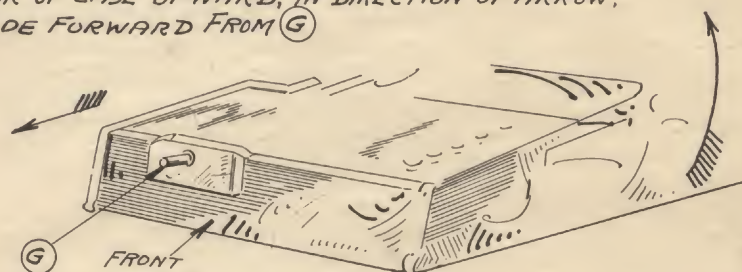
NOTES ON DISMANTLING THE BASE OF THE KAA MACHINES
